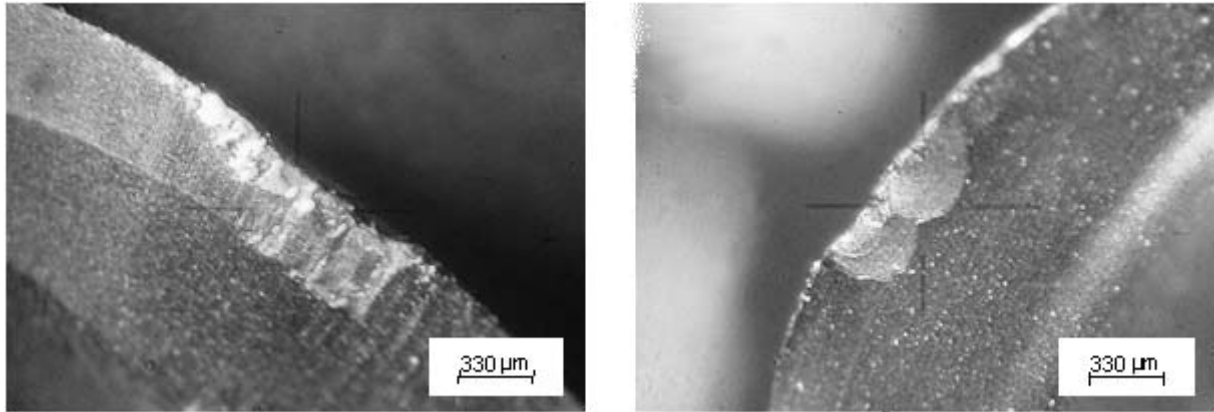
Flank and face of K20/30 tool after 90 min of cut.
